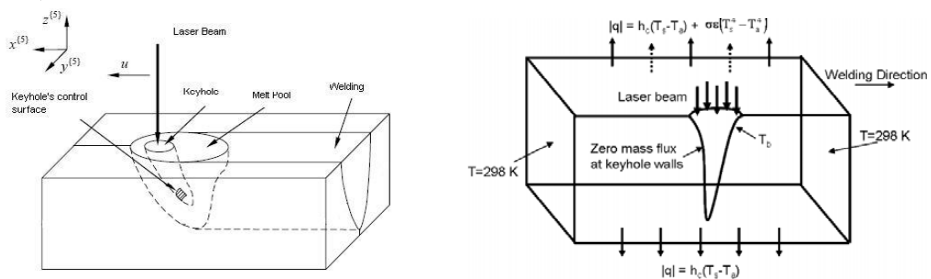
(a) Butt laser welding; (b) laser welding process physics
